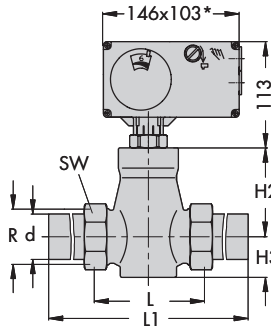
· Valve versions (see page 26 for valves with welding ends)
